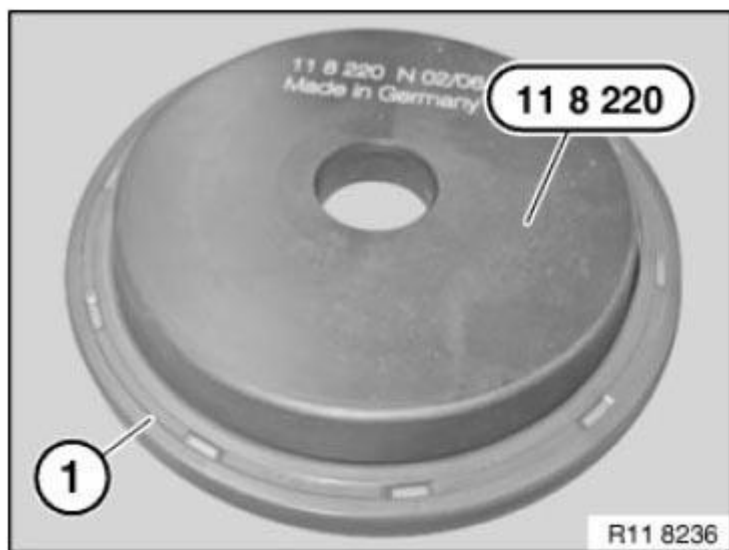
Identifying Radial Shaft Seal On Special Tool 11 8 220
